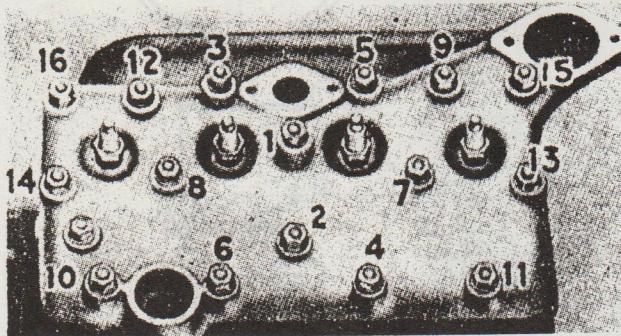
Showing the order for tightening the cylinder head nuts.
